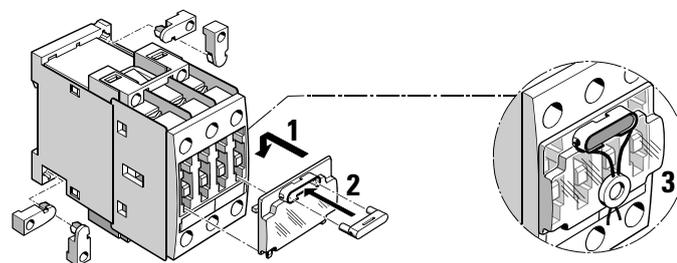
Contactor frame size:S0 to S12 with sealable cover
